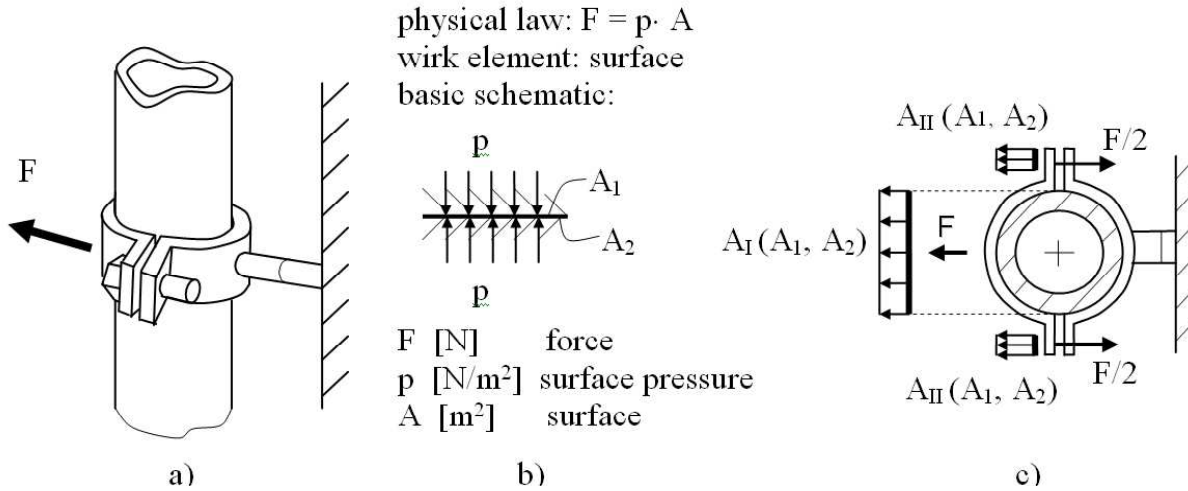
a) 3D model of a tube joint and b) basic schematic of the physical law and c) cross section with loading of the clamp part of the joint.
